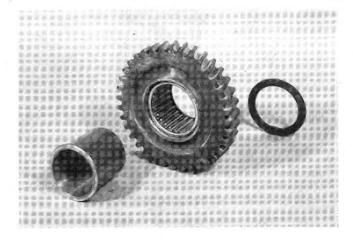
Rework 1st gear, special thrust washer and needle bearing.
